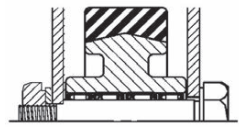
Clutch and bearing arrangement for heavy loads
